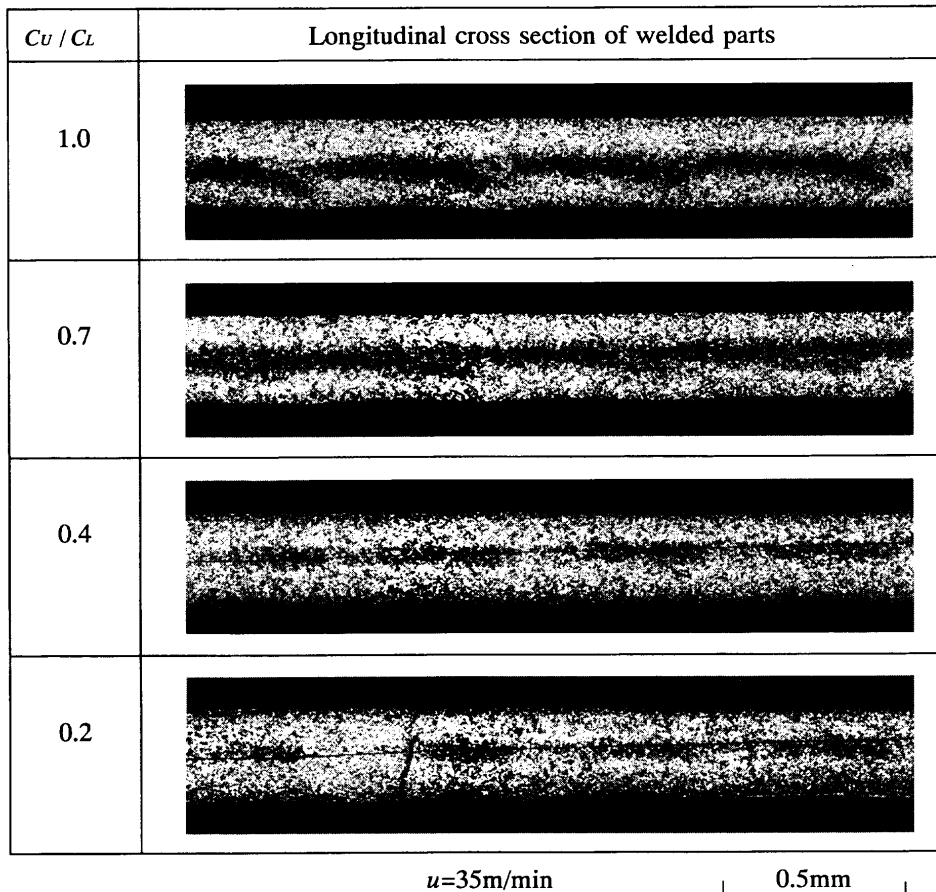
Longitudinal cross section of welded parts of differentially tin-coated LTS.
